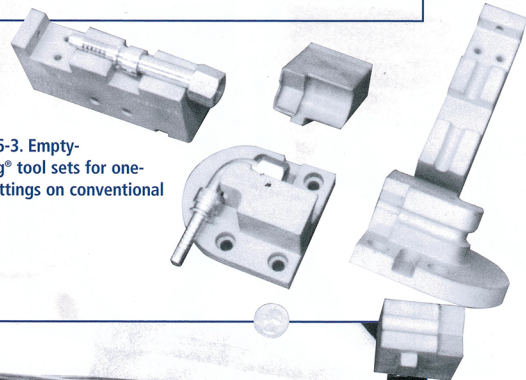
Empty-Bending® tool sets for one-piece fittings on conventional bender.
